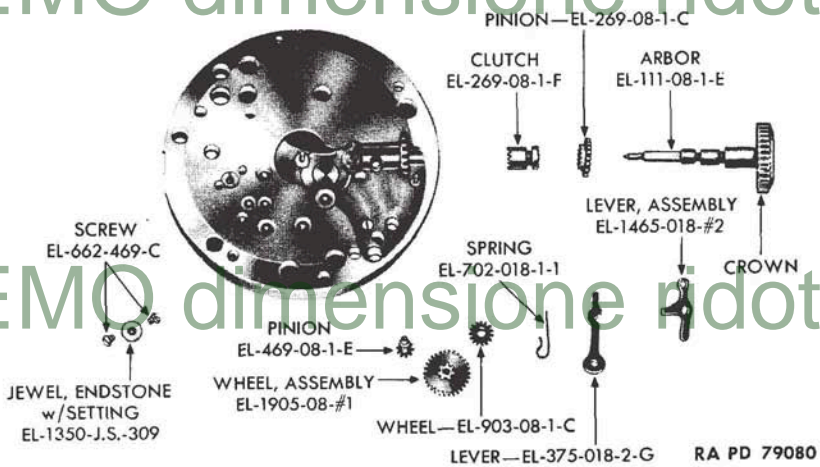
Elgin Wrist Watch — Setting Mechanism Removed
